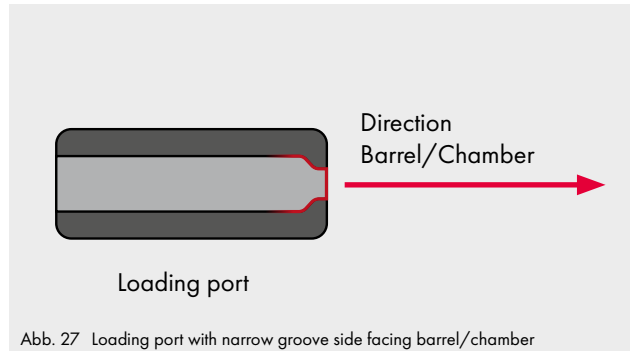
Loading port with narrow groove side facing barrel/chamber
